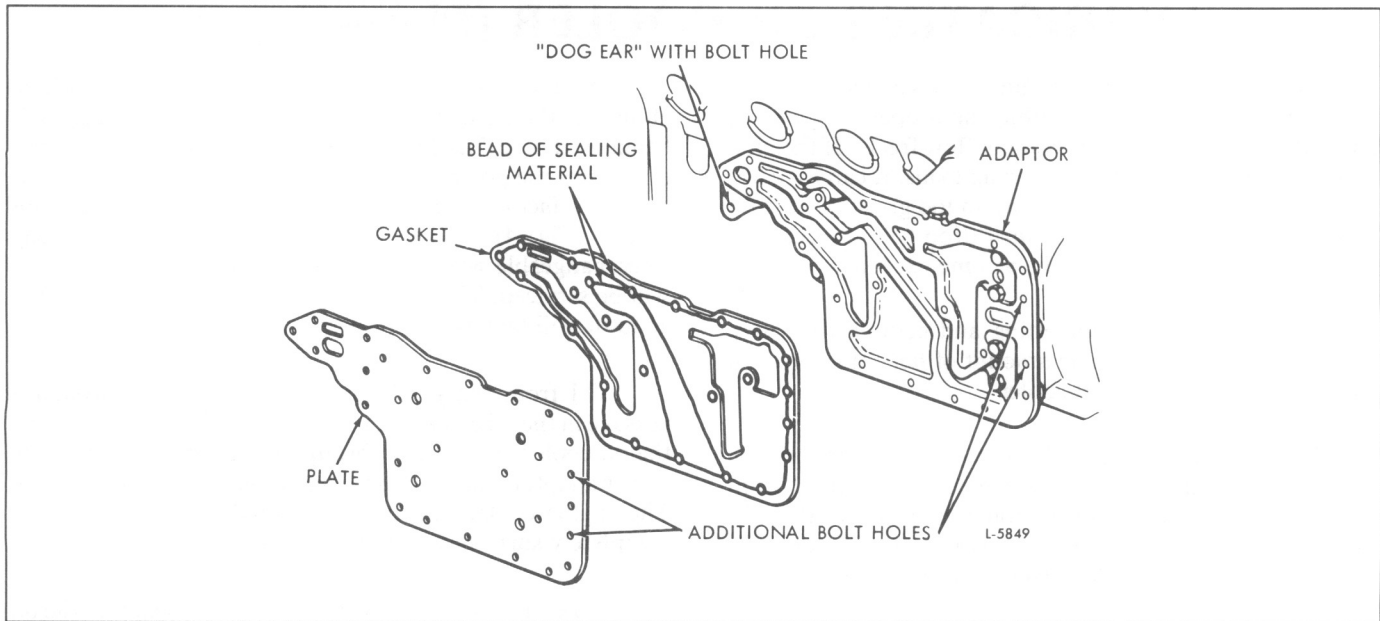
Oil Cooler Adaptor (Certain Vehicle Engine)
